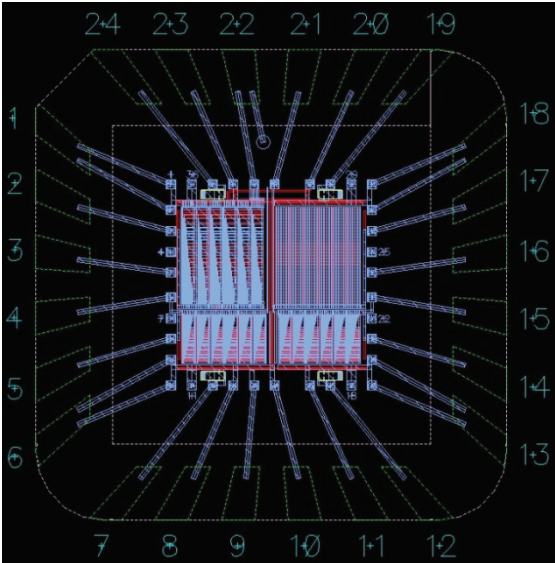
Bonding diagram of the chip pad, bond wire, and package pin design.
